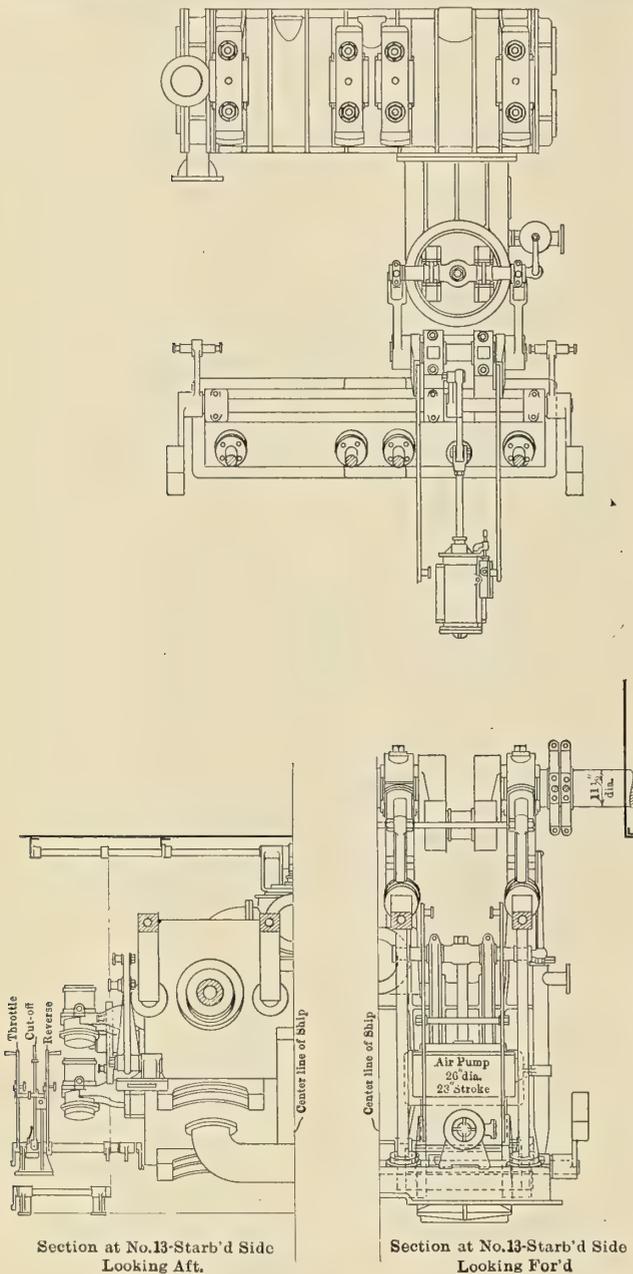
SECTIONAL VIEWS OF DORCHESTER'S ENGINE
